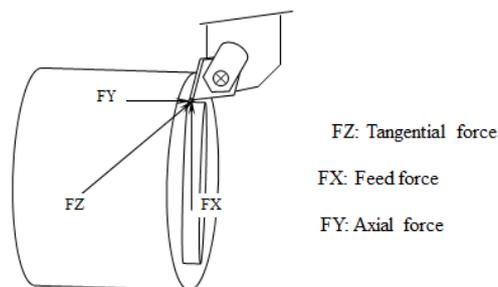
Direction of the cutting forces measured by the dynamometer at the insert/workpiece point of contact
